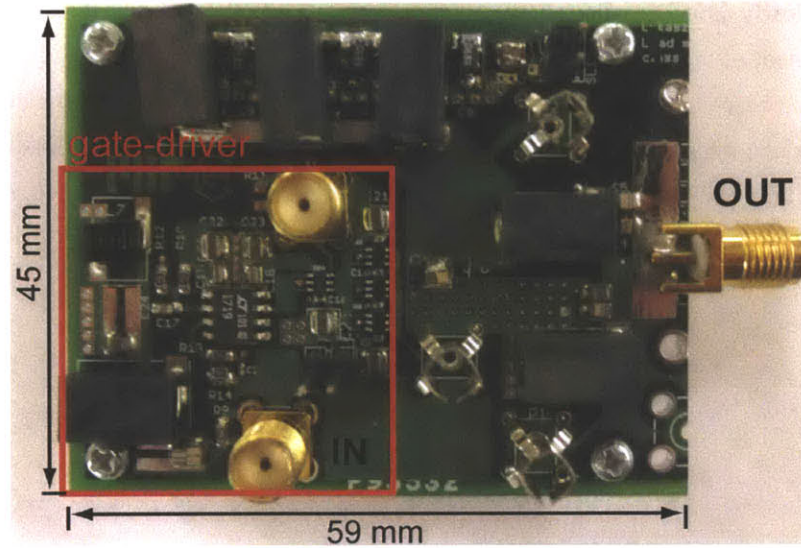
Photograph of a single implemented Class-E PA PCB.
